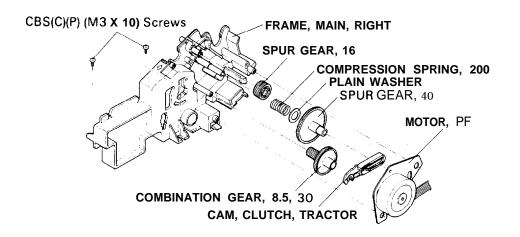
Disassembling the FRAME, MAIN, RIGHT
